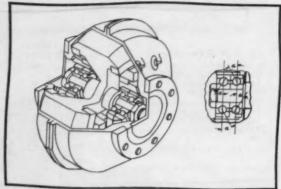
A patented navigator-gyroscope gimbal assembly employing preloaded bearings with specially designed rotor and housing shapes
